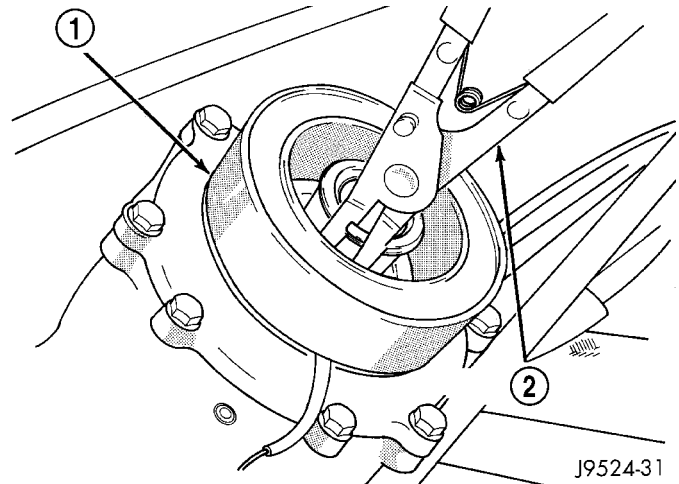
CLUTCH FIELD COIL SNAP RING REMOVE - Typical
